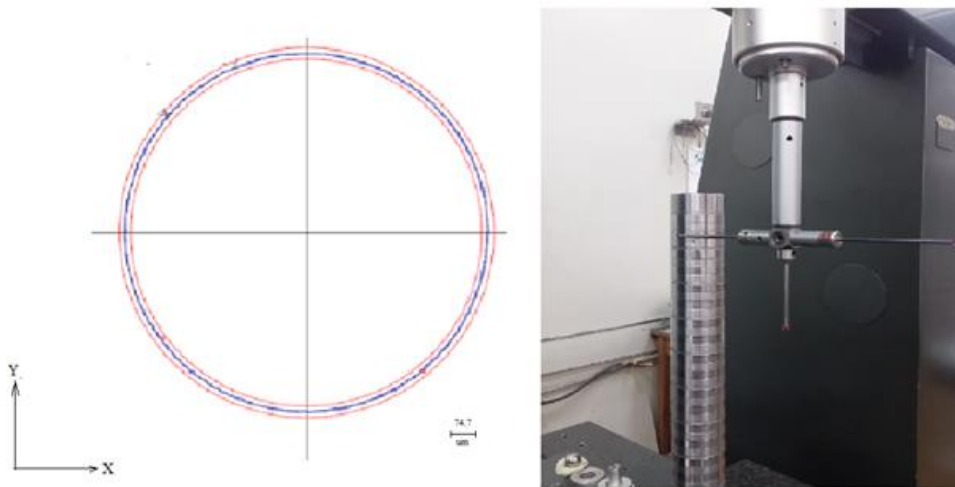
Out of roundness measurements of the workpiece using CMM machine.
